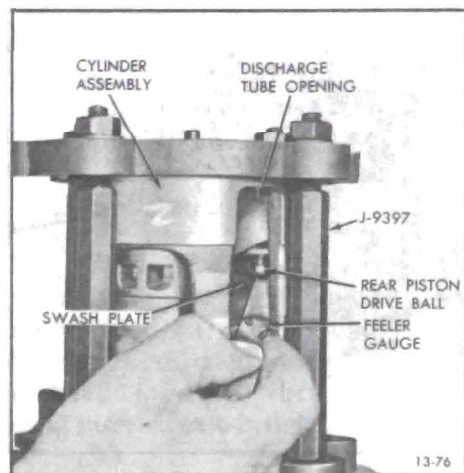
Checking Clearance Between Rear Piston Drive Ball and Swashplate.
